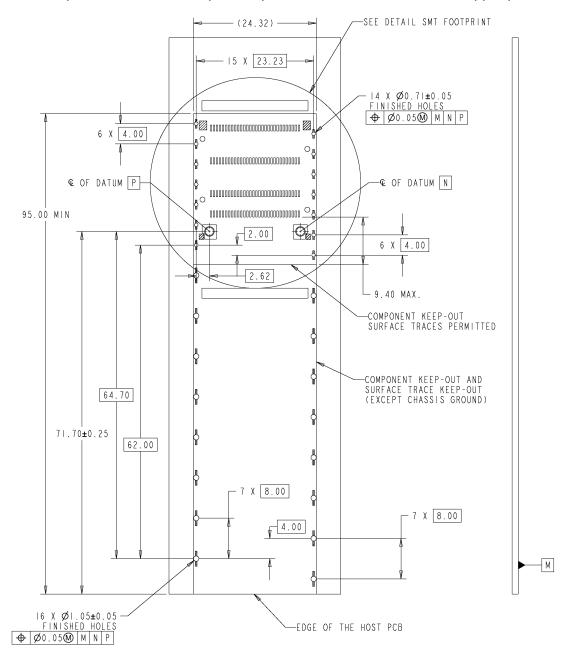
Host PCB Layout for 2x1 SMT cage
